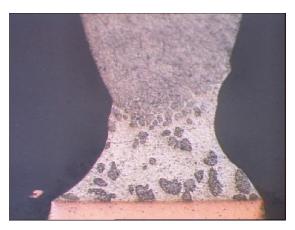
Microsection of CGA mounted on PCB showing minimum solder: Acceptable
